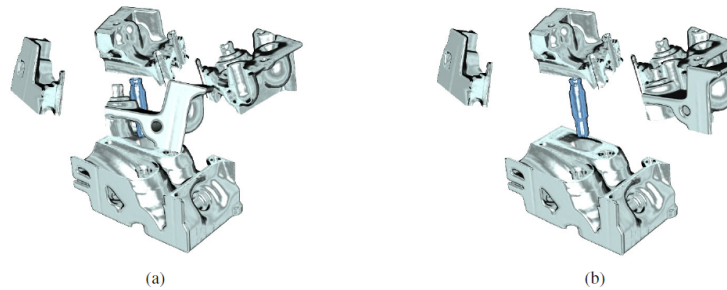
(a) force-based exploded view without viewing force (interesting part is occluded) (b) with viewing force [5]
